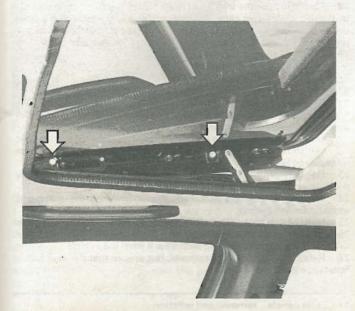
Sunroof glass panel securing bolts (arrowed) (Sec 29)
